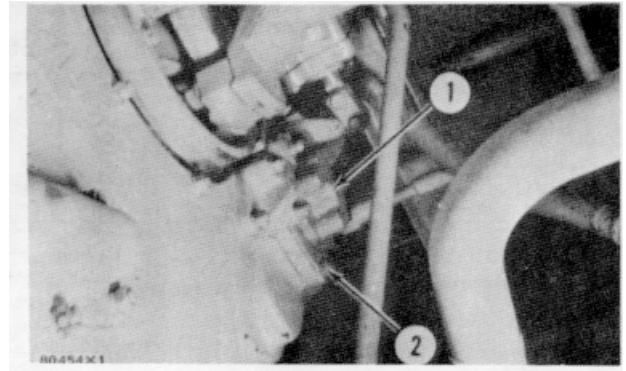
PHOTO IS A VIEW FROM UNDER MACHINE FOR BETTER ILLUSTRATION
